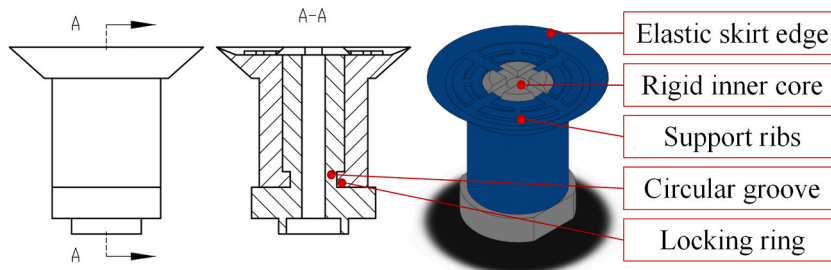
The design of the mechanical structure of vacuum suction cup.
